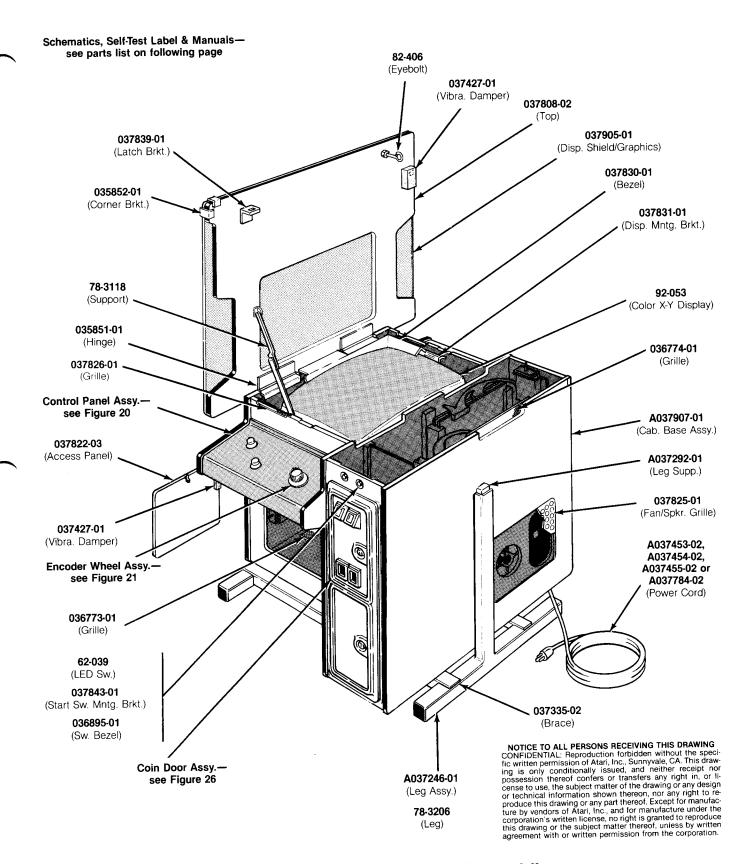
Cabinet-Mounted Assemblies A037900-xx A
